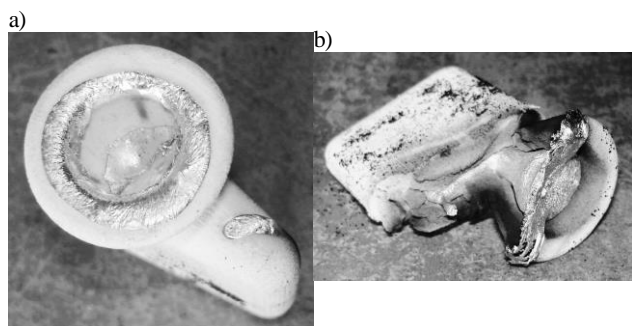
Ceramic mould after pouring: a) ZNAL5, b) AK11
